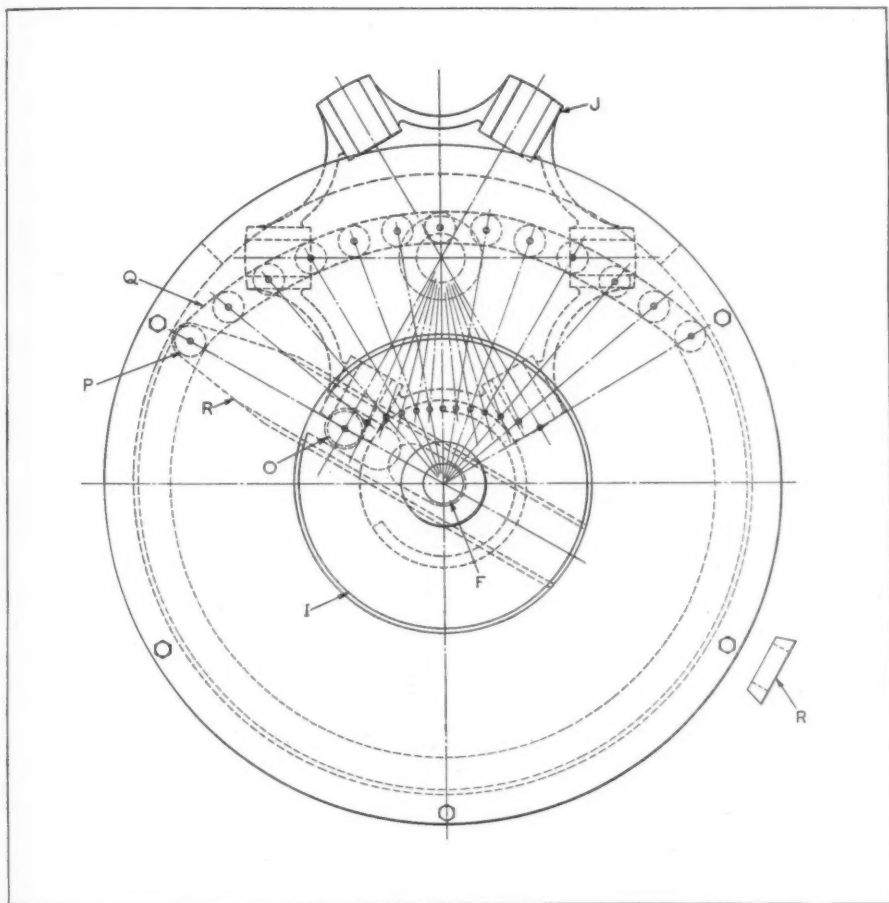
End View of Geneva Motion Mechanism Shown in Fig. 1
